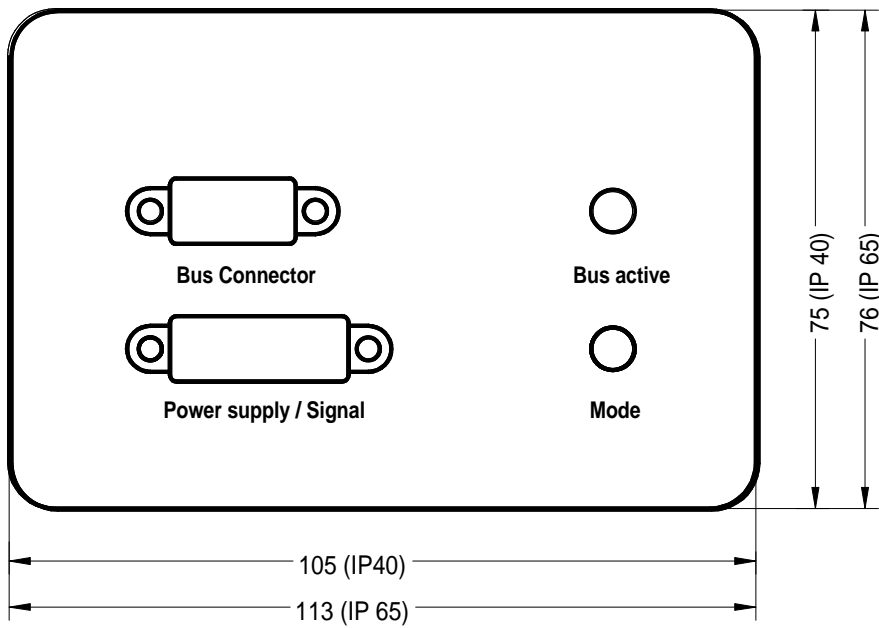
ATMION™ Wide Range Manometer Standard Version (rear view on controller)
